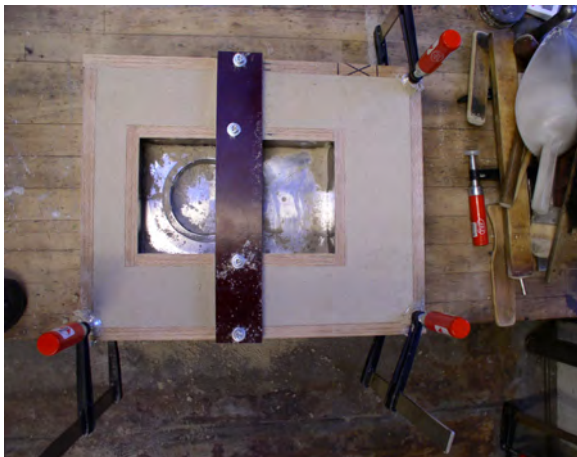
Frame core for layout no. 4 made over the swing plate pattern.
